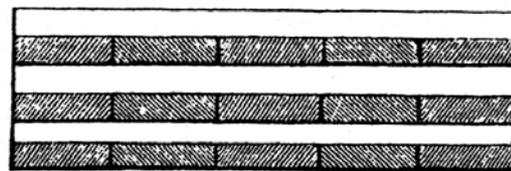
Pile of bars for rolling plates, each layer oriented 90° to the one below. (Fairbairn²)
